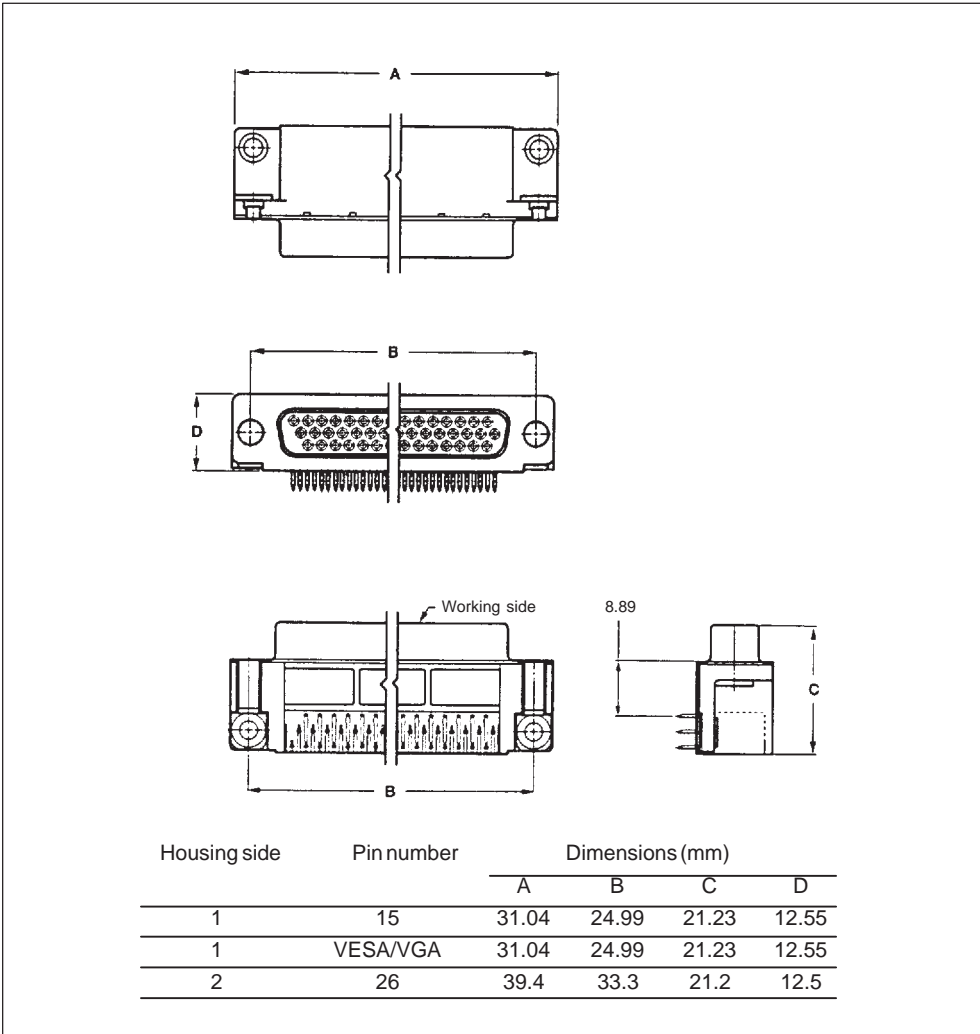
Dimensional drawing of 3-row subminiature plug connectors (socket terminal strip)
